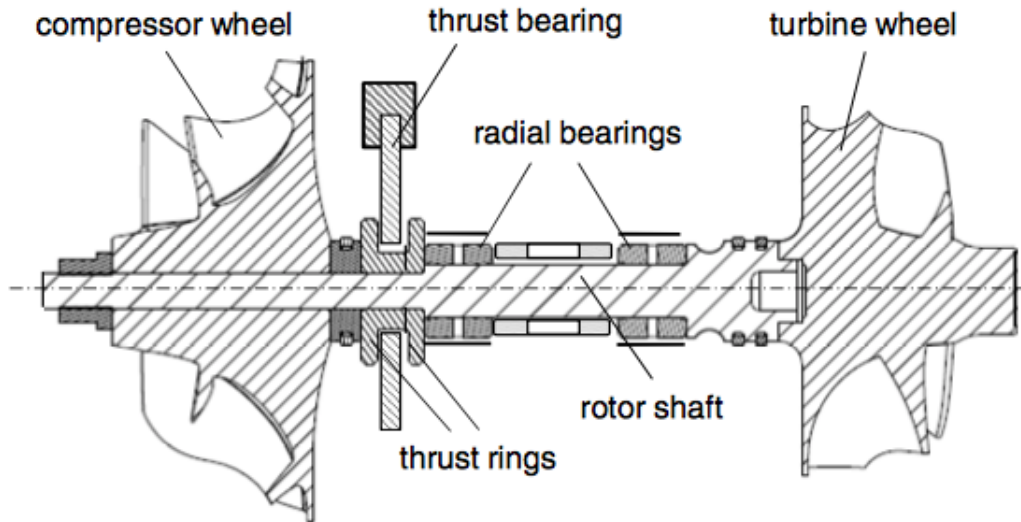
Thrust bearing in the turbocharger, featuring the compressor wheel, the turbine wheel, and a segment of bearing[6].
